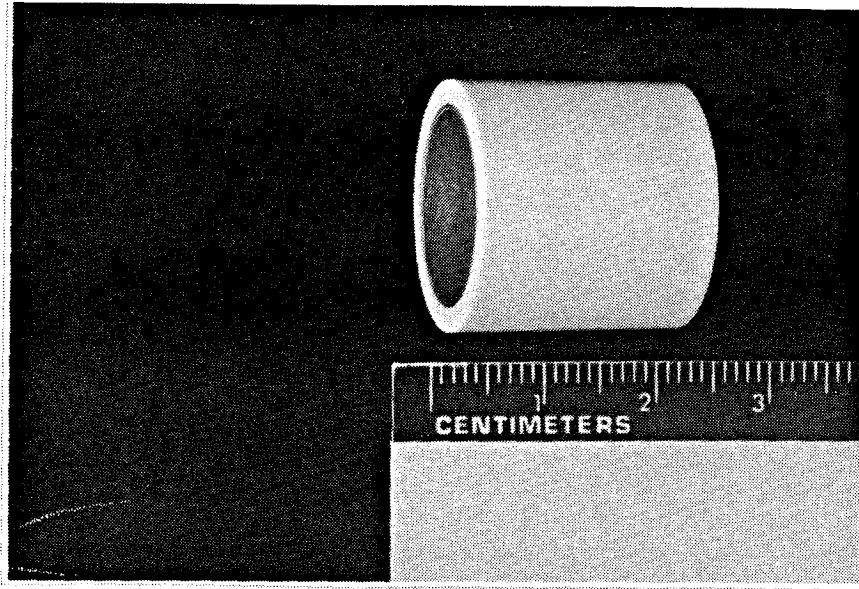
Fully Processed 0.056 cm (0.22") Thin Wall Compression Specimen.
